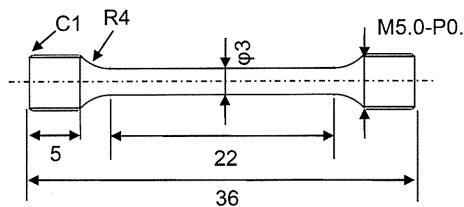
Ti-36Nb-2Ta-3Zr-0.3O alloy rod for tensile test
